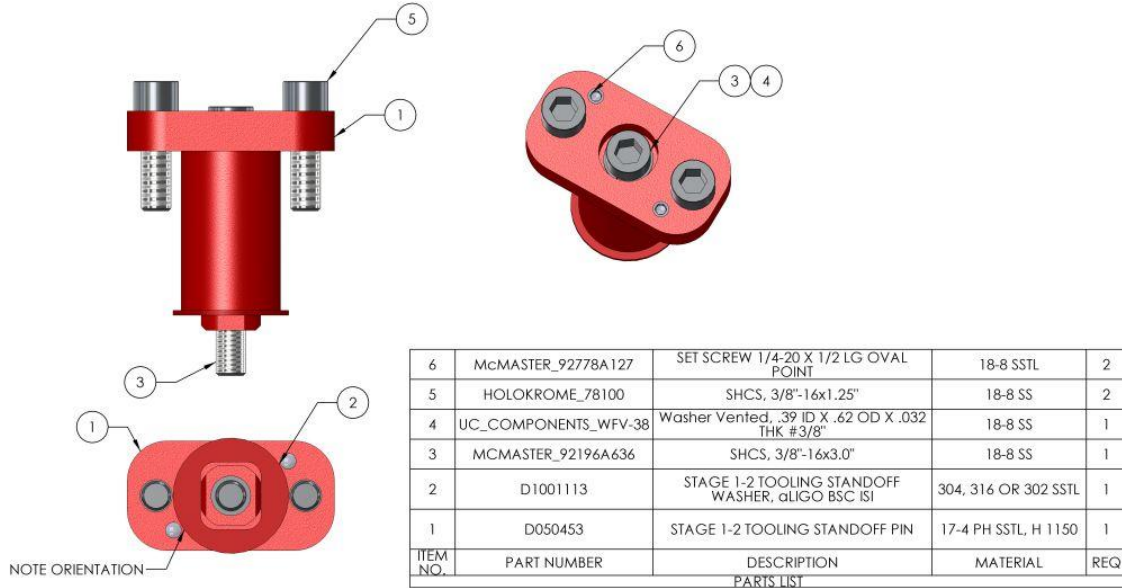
Assembly drawing of D1001112 Stage 1-2 Tooling Standoff Pin
